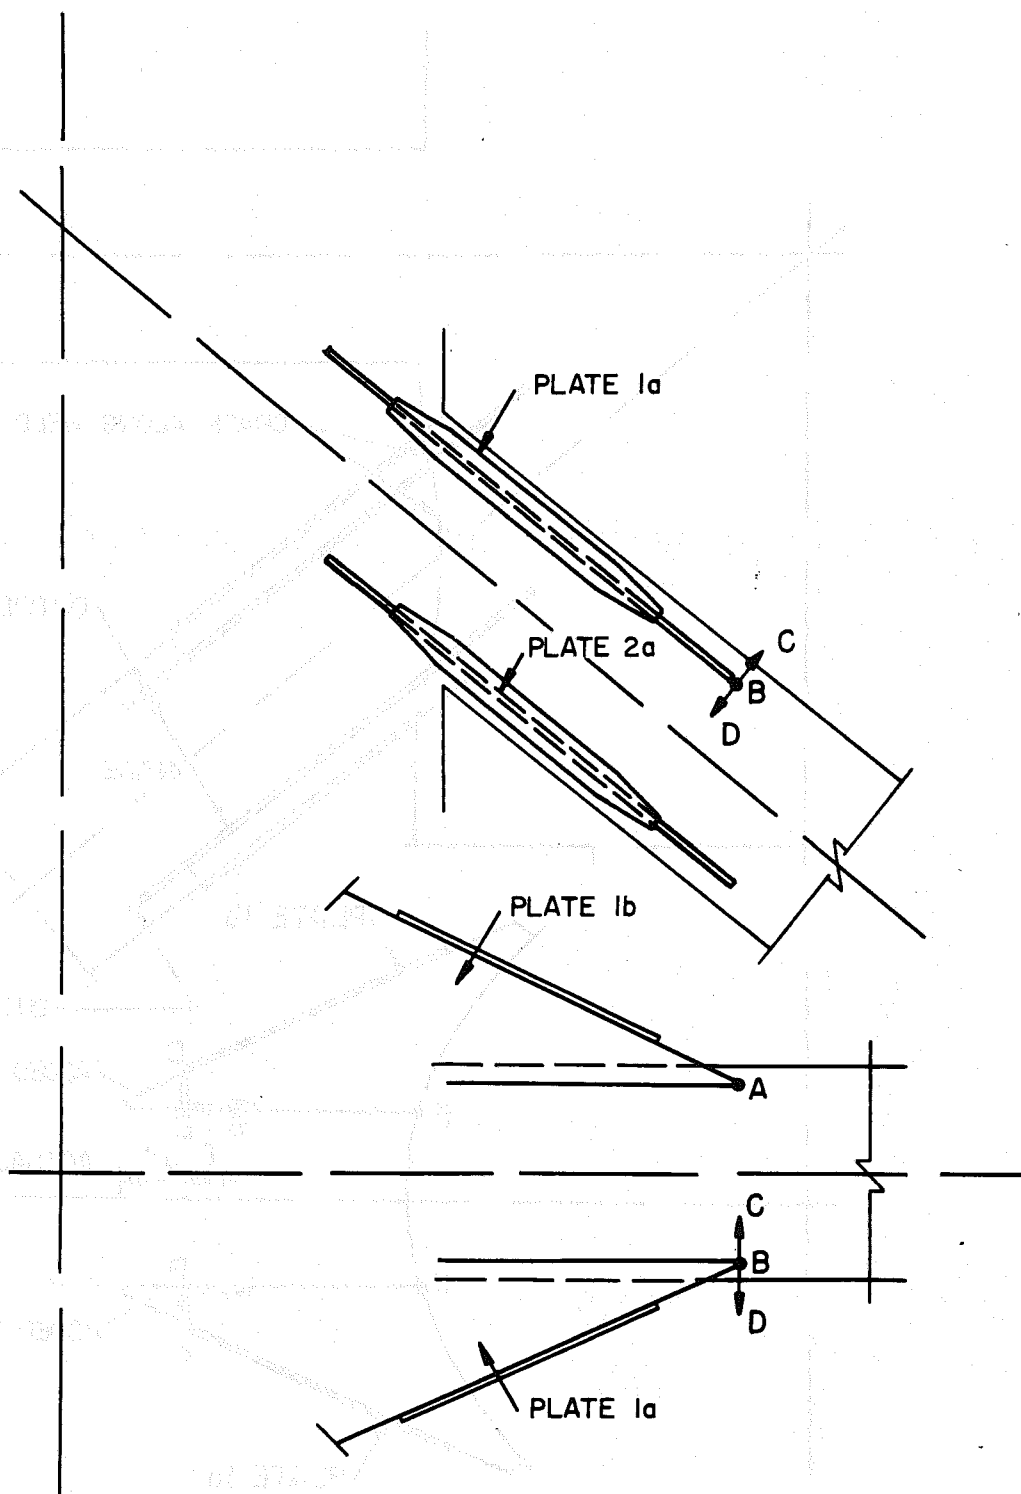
CRACK PROPAGATION UNDER ALTERNATING LOAD
